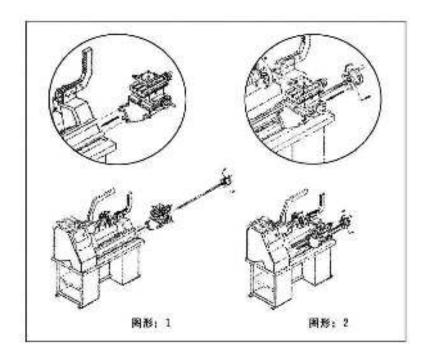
Montage the base cross sliding table to the body by the sliding rows.
